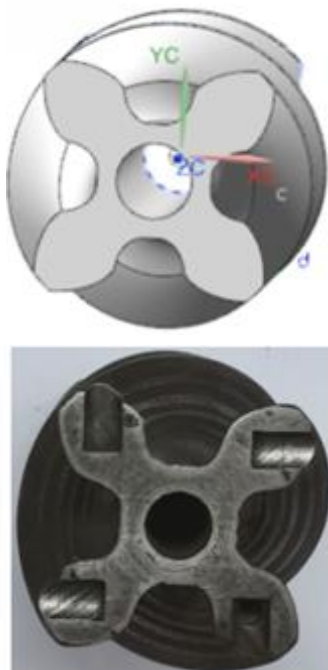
machined cross-sectional profile of the rotor in comparison with the designed one.
